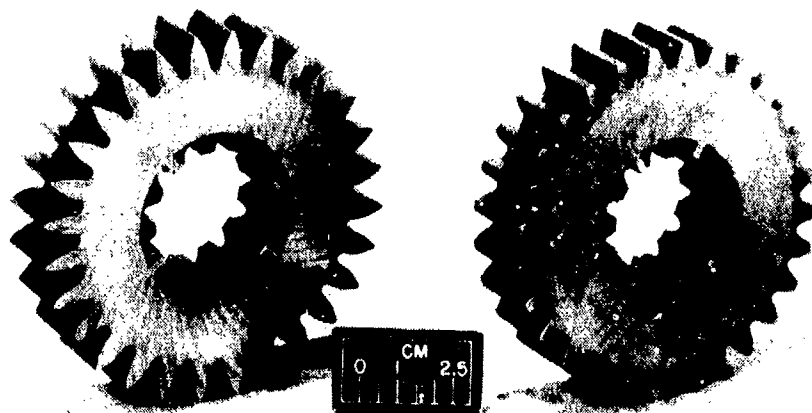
New-tooth-form (high contact ratio) and standard low-contact-ratio gears. Test specimens for Wright Air Development Division gear test rig.
